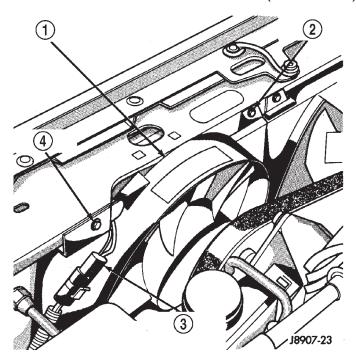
Auxiliary Cooling Fan—Remove/Install— Typical
